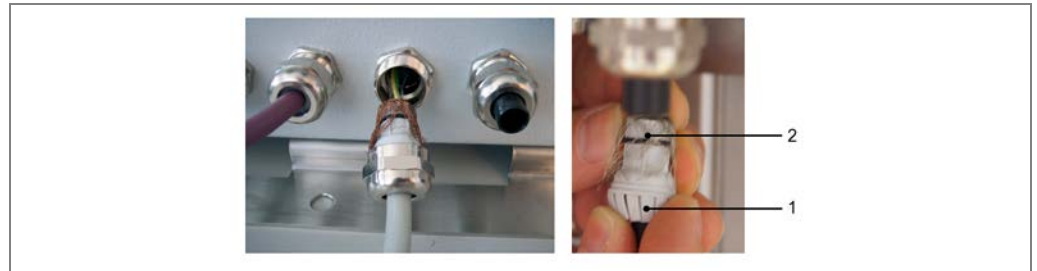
Connecting the cable shielding at the inlet to the controller cabinet
